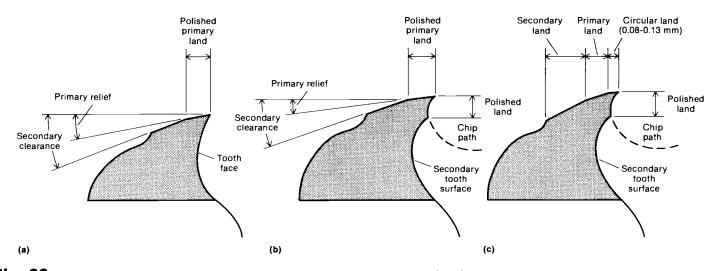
Three end mill geometries designed for the cutting of aluminum alloys. (a) Conventional milling. (b) Heavy metal removal. (c) Finishing operations. Source: Ref 1
